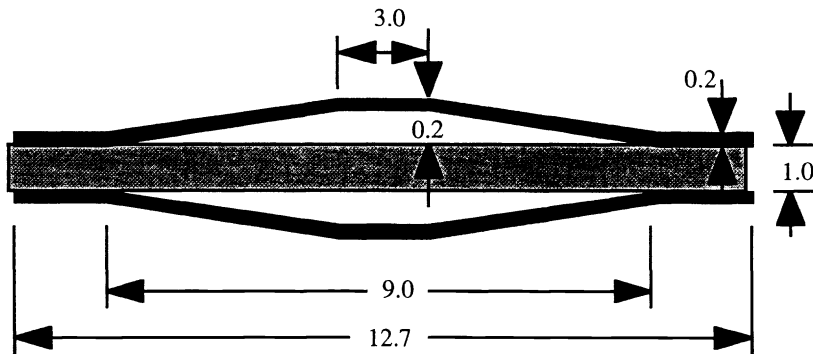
Single cymbal flextensional driver element (dimensions in mm)<sup>13</sup>.
